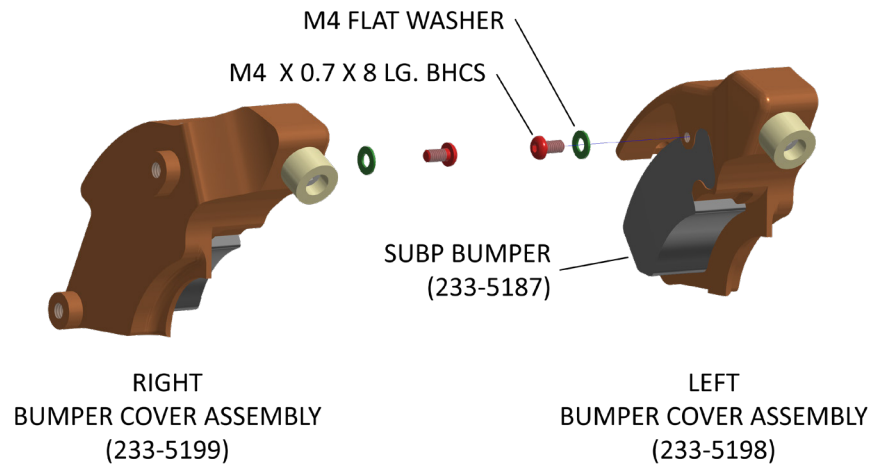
Remove the Fastener and Washer from the Bumper Cover Assemblies
